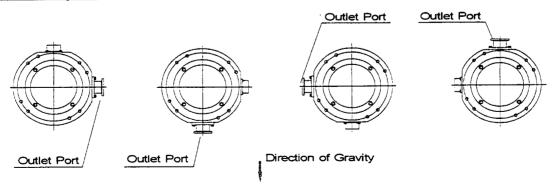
Positions of the Outlet Port on the Horizontally or Slanted Installed STP Pump
